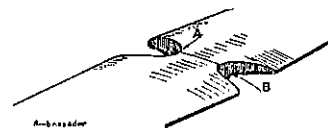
U-shaped mainplane cut-outs for high-wing fitting on fuselage of circular section.
